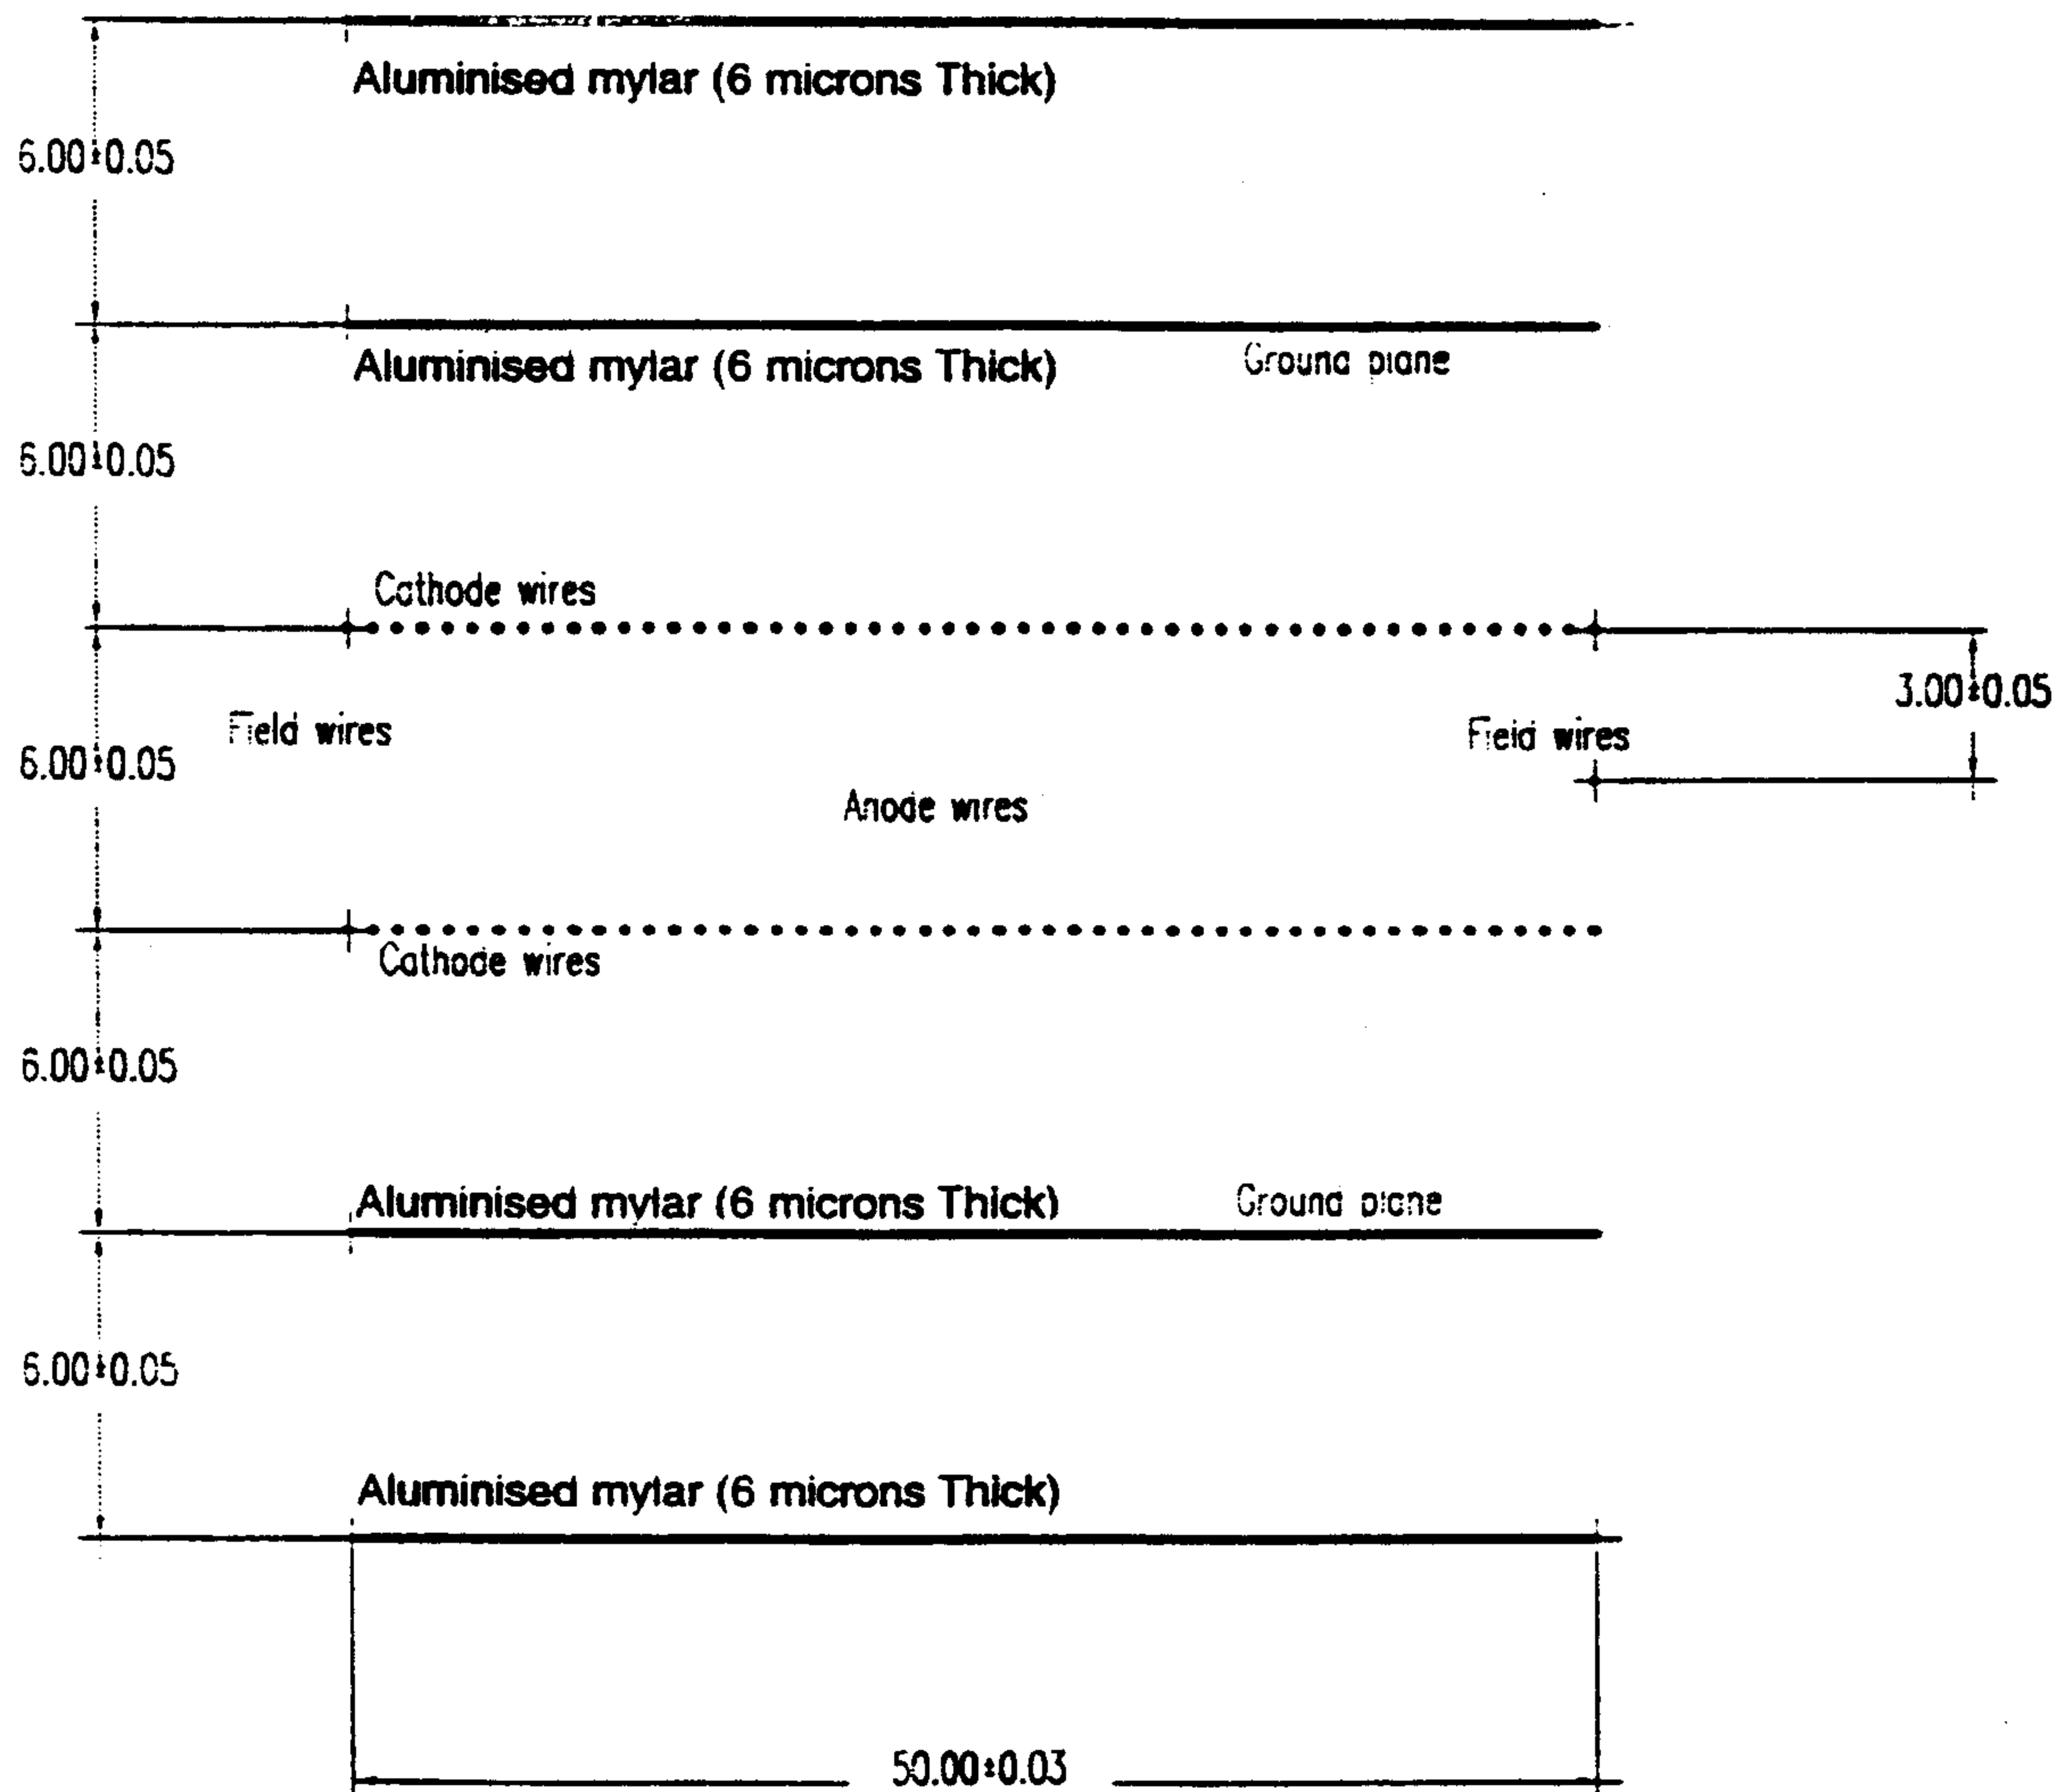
Final drift chamber cell layout with dimensions and mechanical tolerances.
